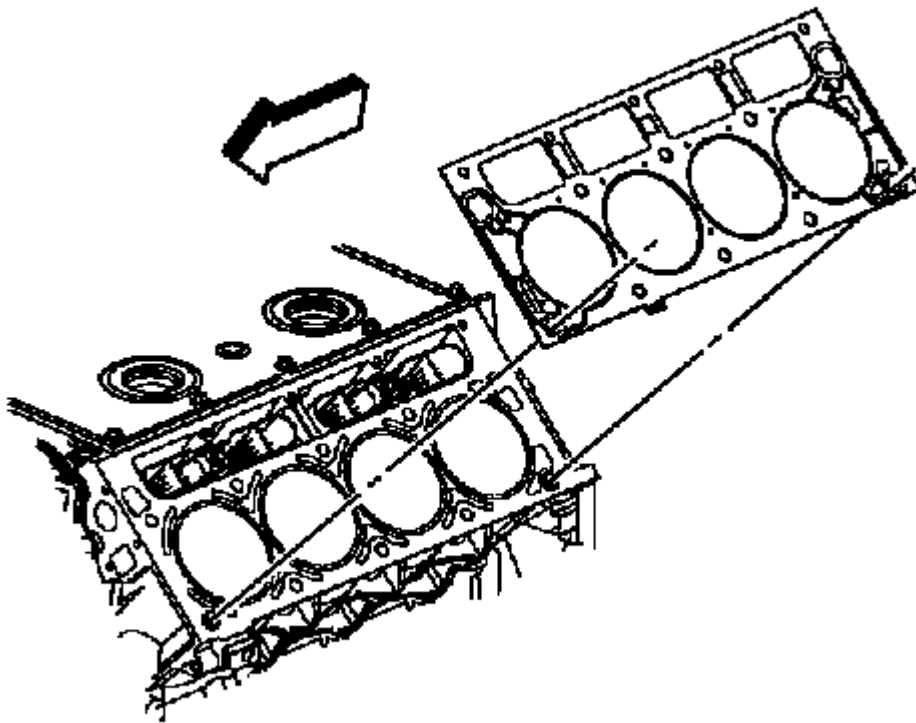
View Of Left Cylinder Head Gasket & Locator Pins
